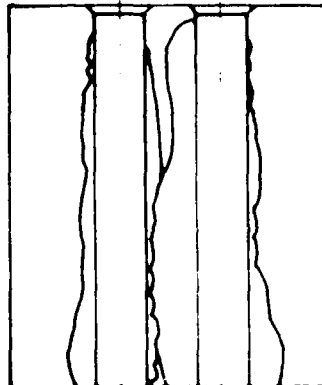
(vi) FRACTURES TYPE (avi) SPECIMENS. COLD-EXPANDED 4 mm, OPEN HOLES
